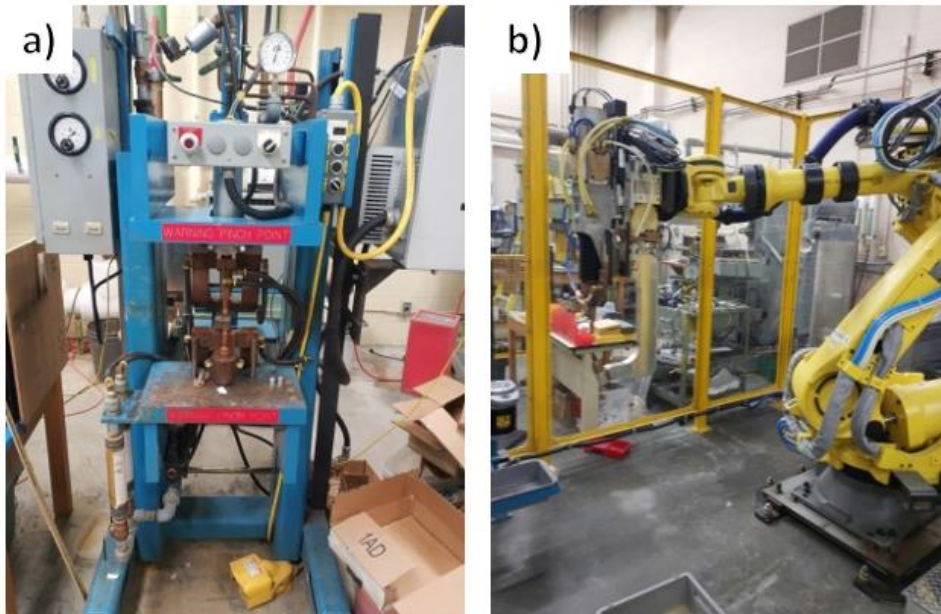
Resistance spot welder on a) pedestal base and b) robot arm.
